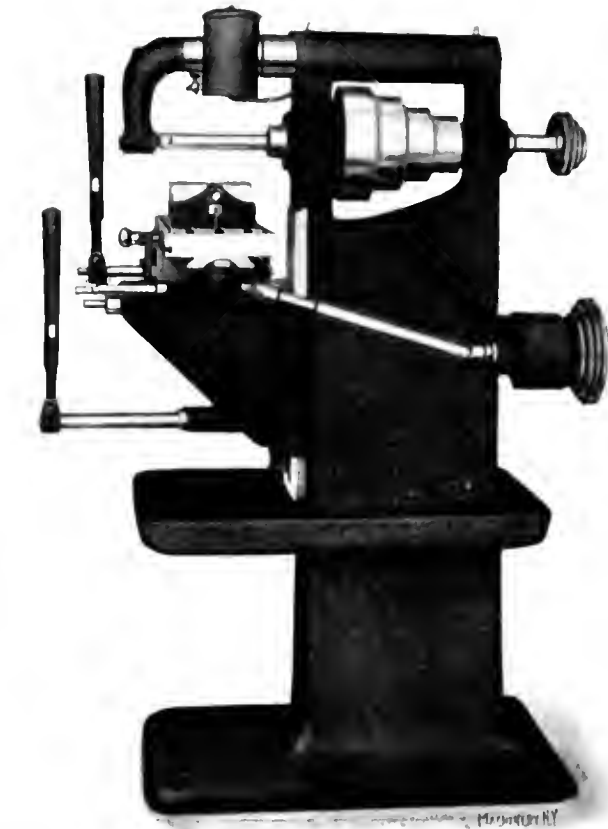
The Chicago Duplex Miller with Overhanging Arm, ready for Horizontal Milling
